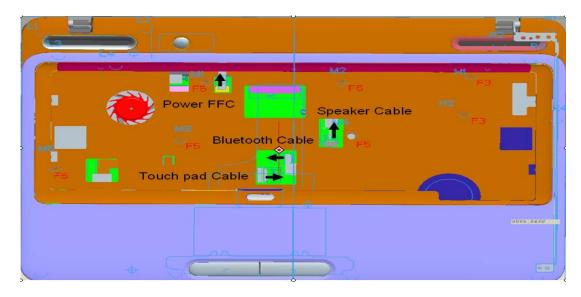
Disconnect the touch pad cable/BT cable/speaker cable/power cable
